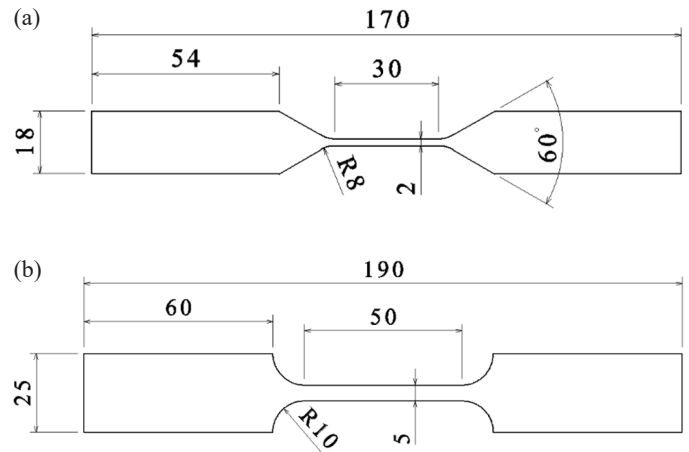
Geometry of the tested specimens: (a) T1 sample; (b) T2 sample
